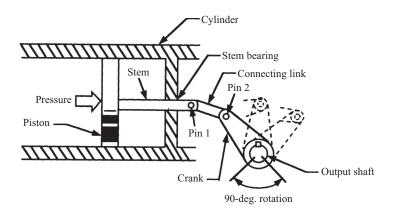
Link-arm connection of piston actuator to rotary valve.
